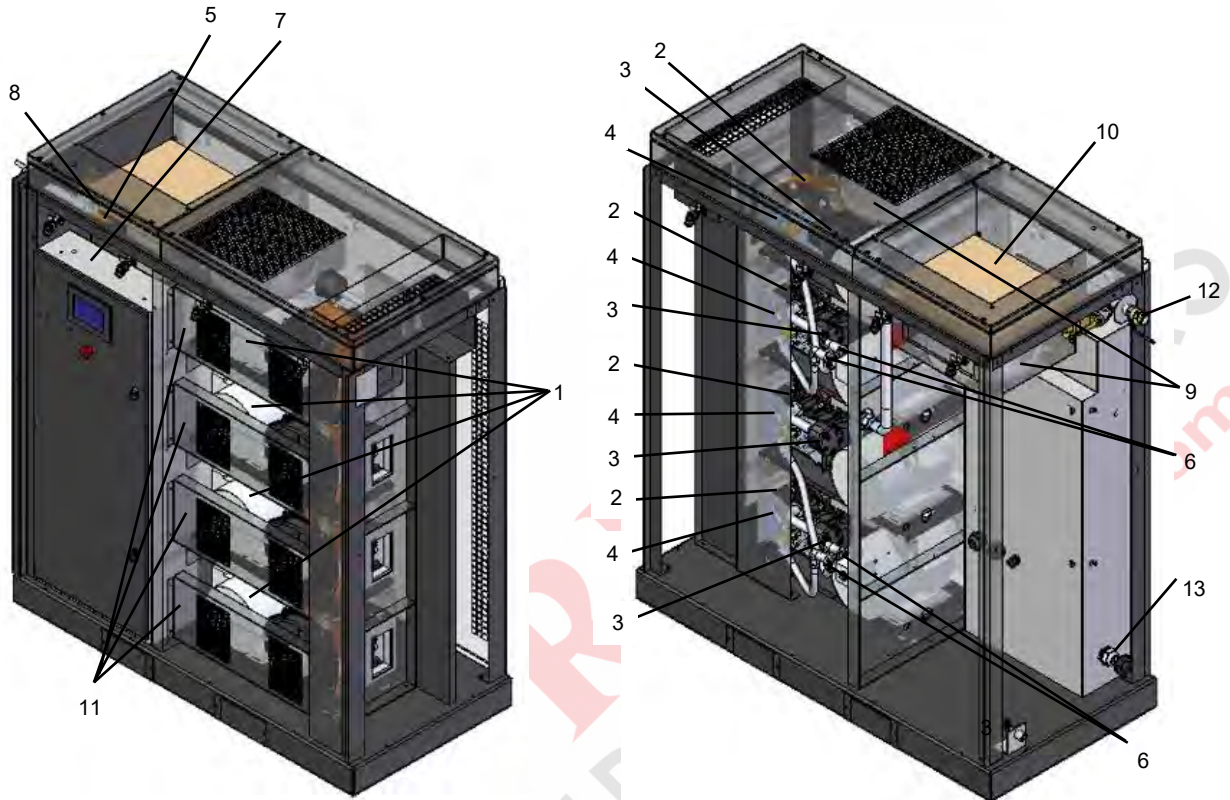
Overview of the assemblies:oil-free scroll compressor 11-15kW
